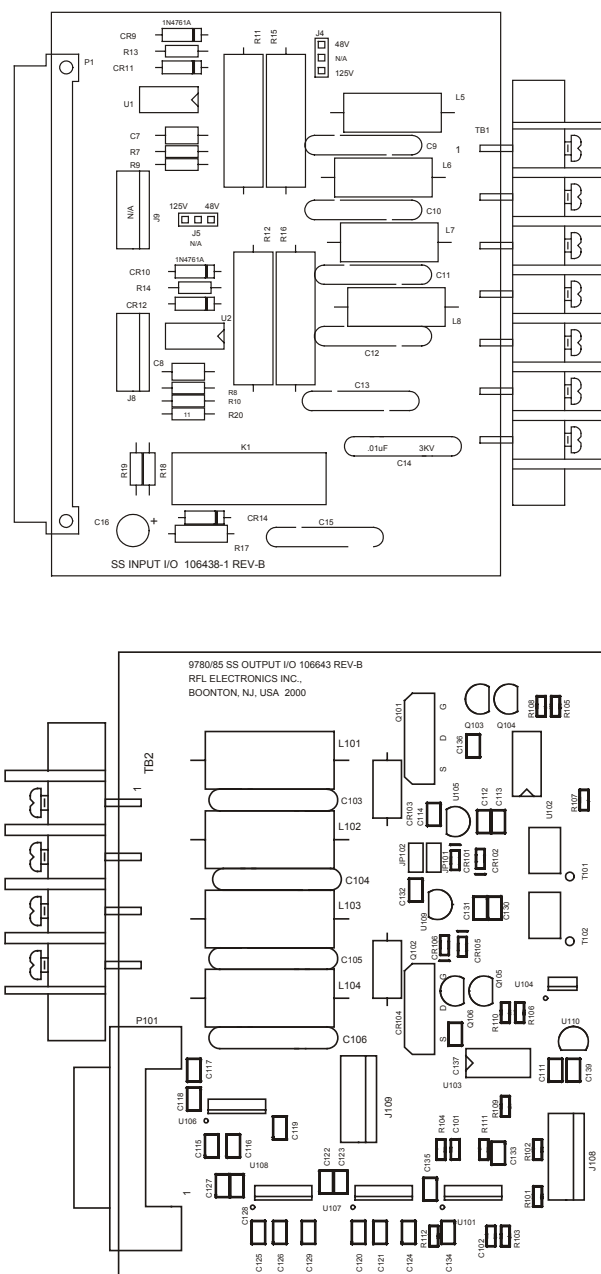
Controls and indicators and component locator drawing, Solid State Input/Output I/O Modules (Assembly No. 106635-1 and 106635-2)
